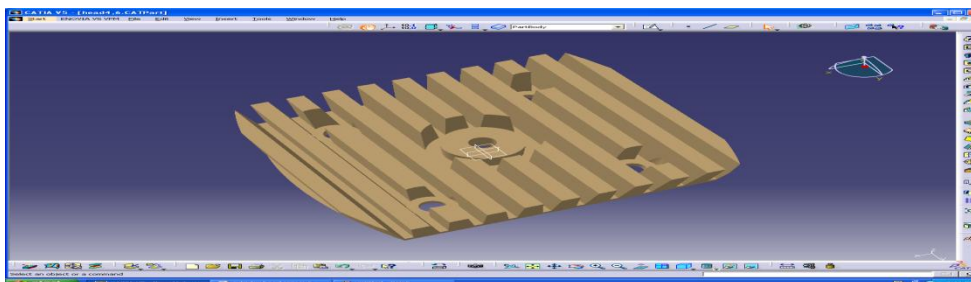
Final model of Cylinder head with fin thickness of 4mm at top 6mm at bottom
